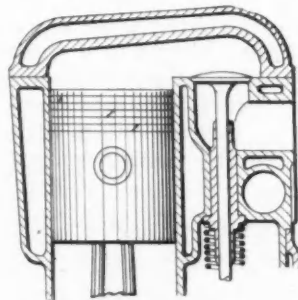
L-HEAD CYLINDER WITH HEAD PARTING PLANE ABOVE PISTON FACE
